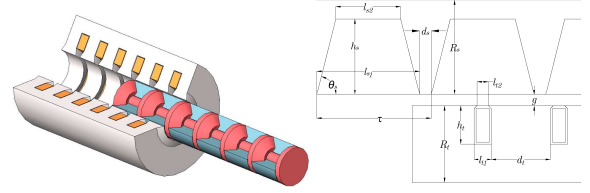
Dimensions of the studied 6-4 linear tubular SRM.
